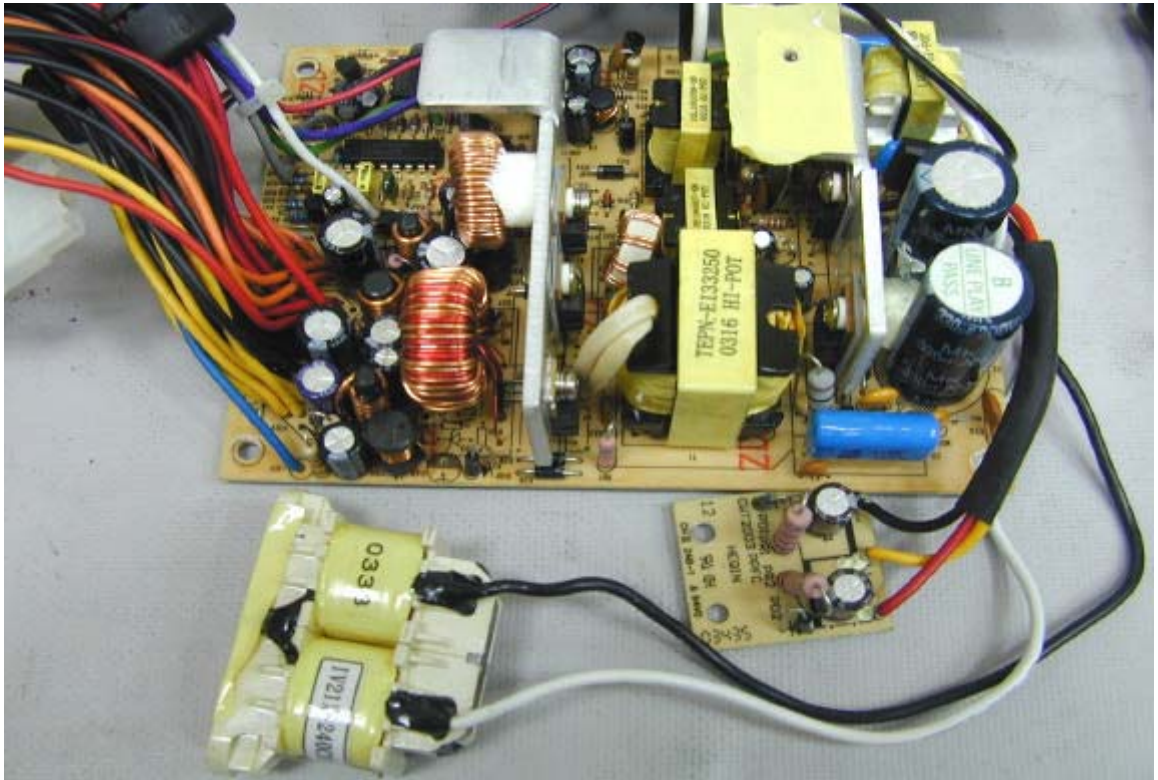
POWER SUPPLY COMPONENT SIDE VIEW
